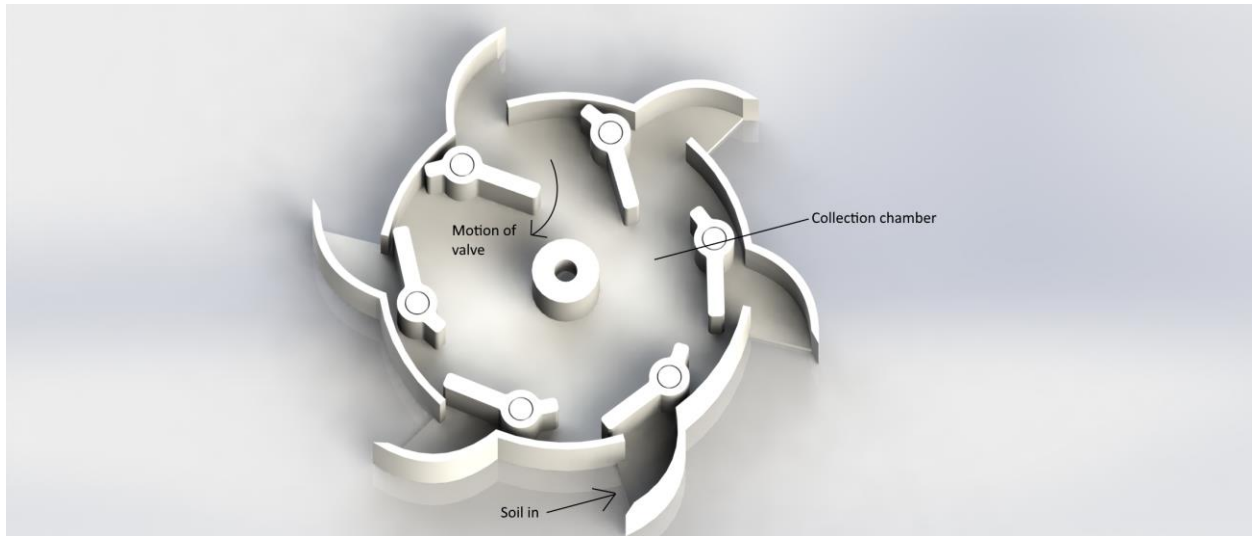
Cutaway of the wheel showing the interior mechanism by which soil is collected.
